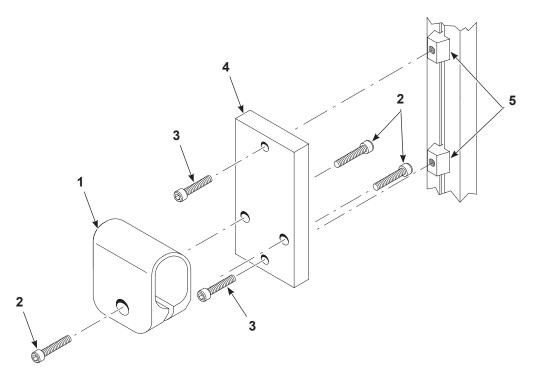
Extrusion Gun Mount Assembly for Tube-Mount Guns
